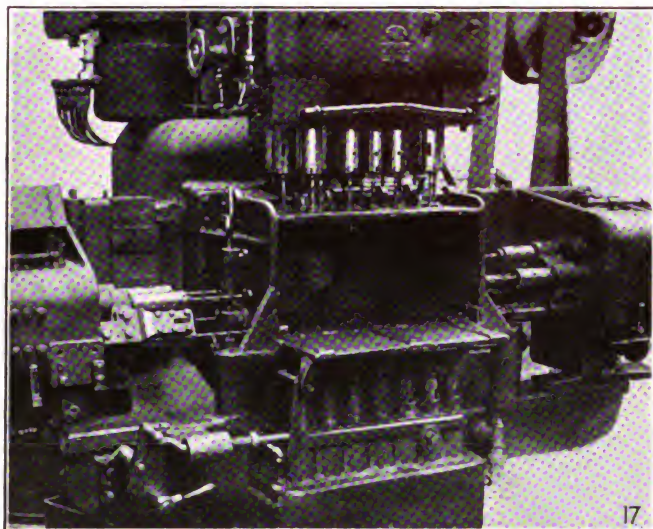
Special four-way drilling machine working in cylinder blocks.
